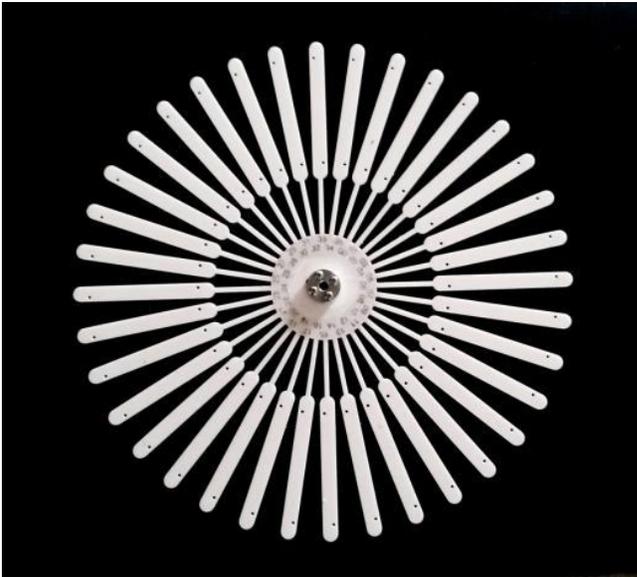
The Plexiglass wheel just cut by the laser machine, with the flange for the motor shaft
